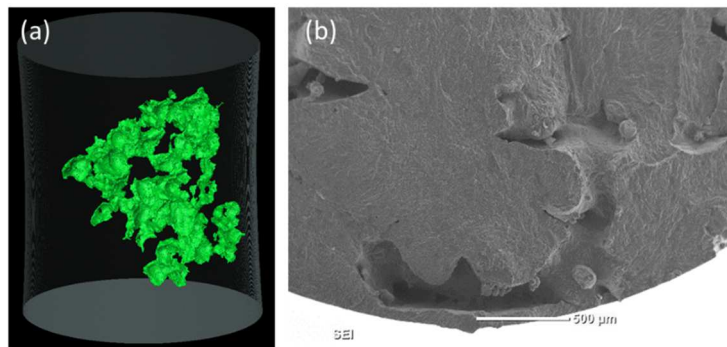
Sample XY16, fatigue limit = 45 MPa (a) 3D view of the critical defect (b) fracture surface showing the critical defect.
